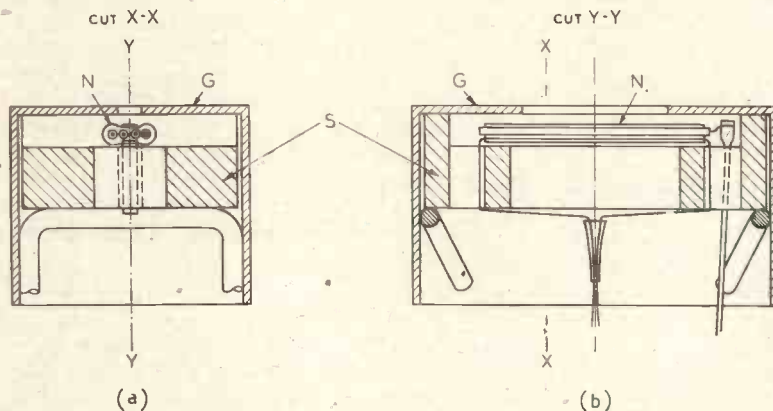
Construction of the indirectly-heated cathode assembly.
